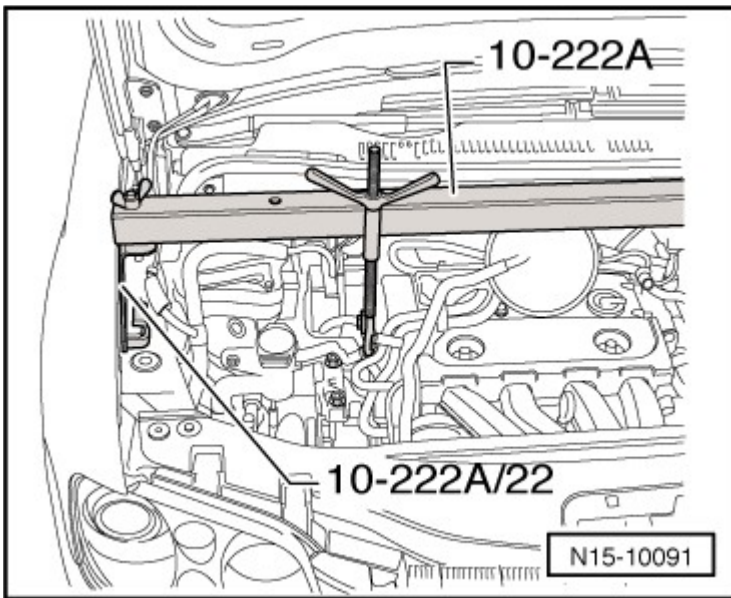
Engine Support Bridge 10 - 222 A Installed Onto Fender Bolting Edge
